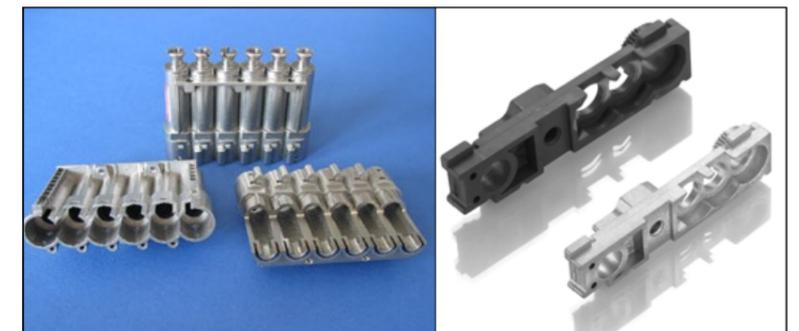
MIM guitar tuner housing (left) and DC motor assembly part (right) (Photo Maxon Motor GmbH)
